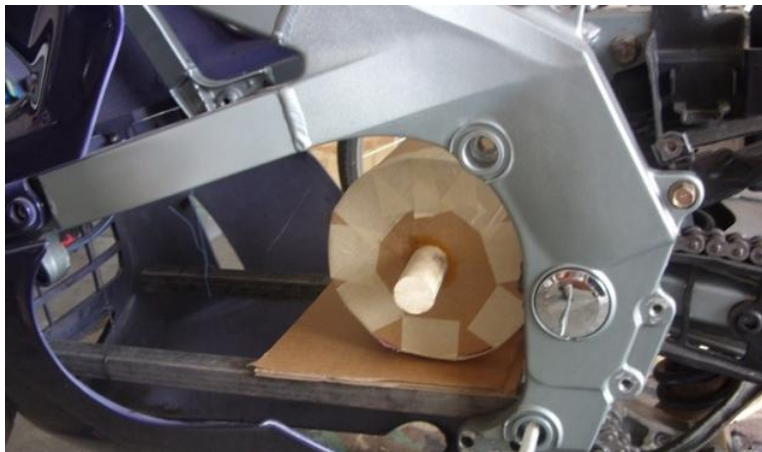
Cardboard motor mockup inside motorcycle chassis
